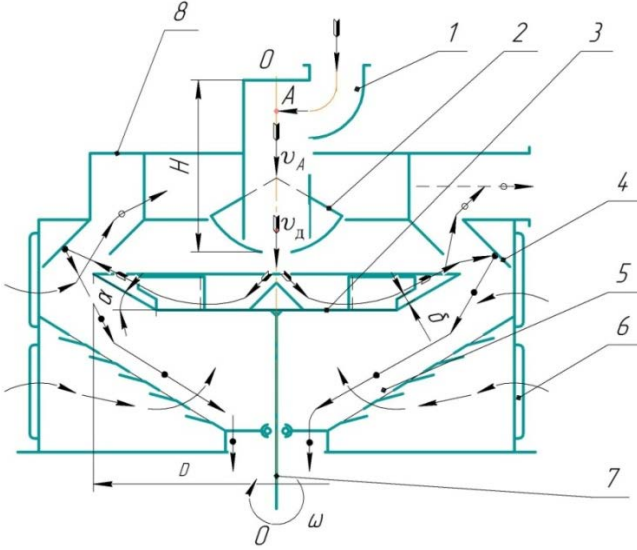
Principal scheme of pneumoviral device [15, 16]: 1 - loading grain lines; 2 - dosing device; 3 - rotary spreader of grain mixture; 4 - the wall of the air channel; 5 - louver cone; 6 - louver cylindrical wall; 7 - separator rotor shaft; 8 is a casing.
